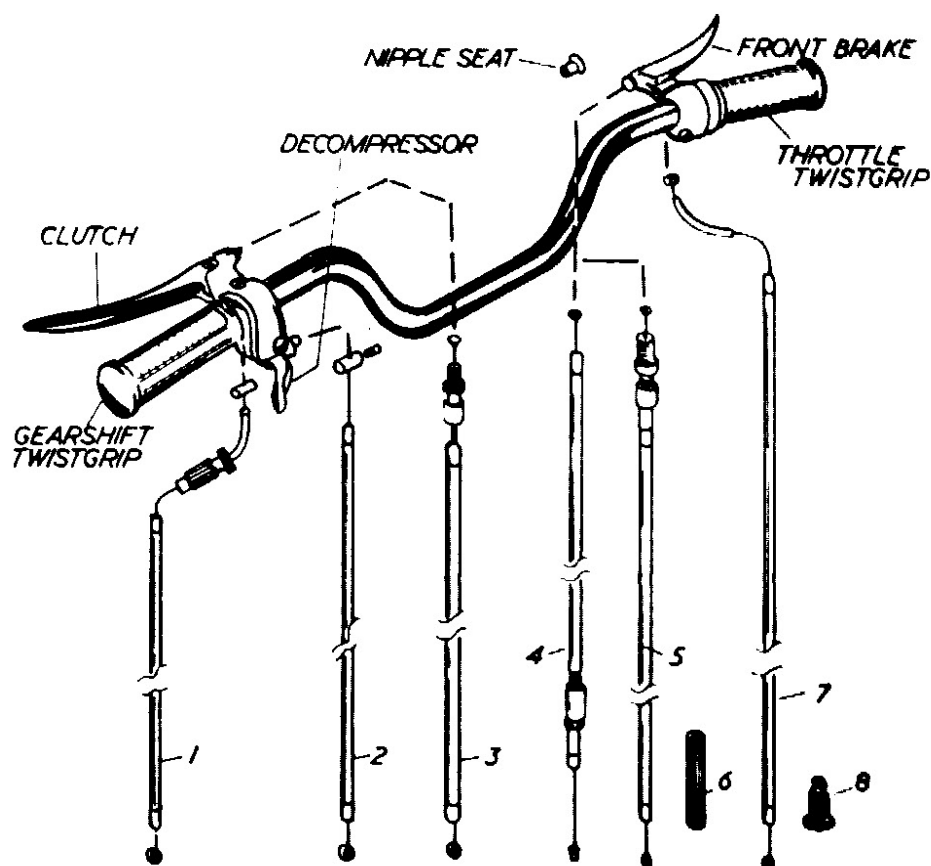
HANDLEBARS AND CABLES N AND S MODELS
